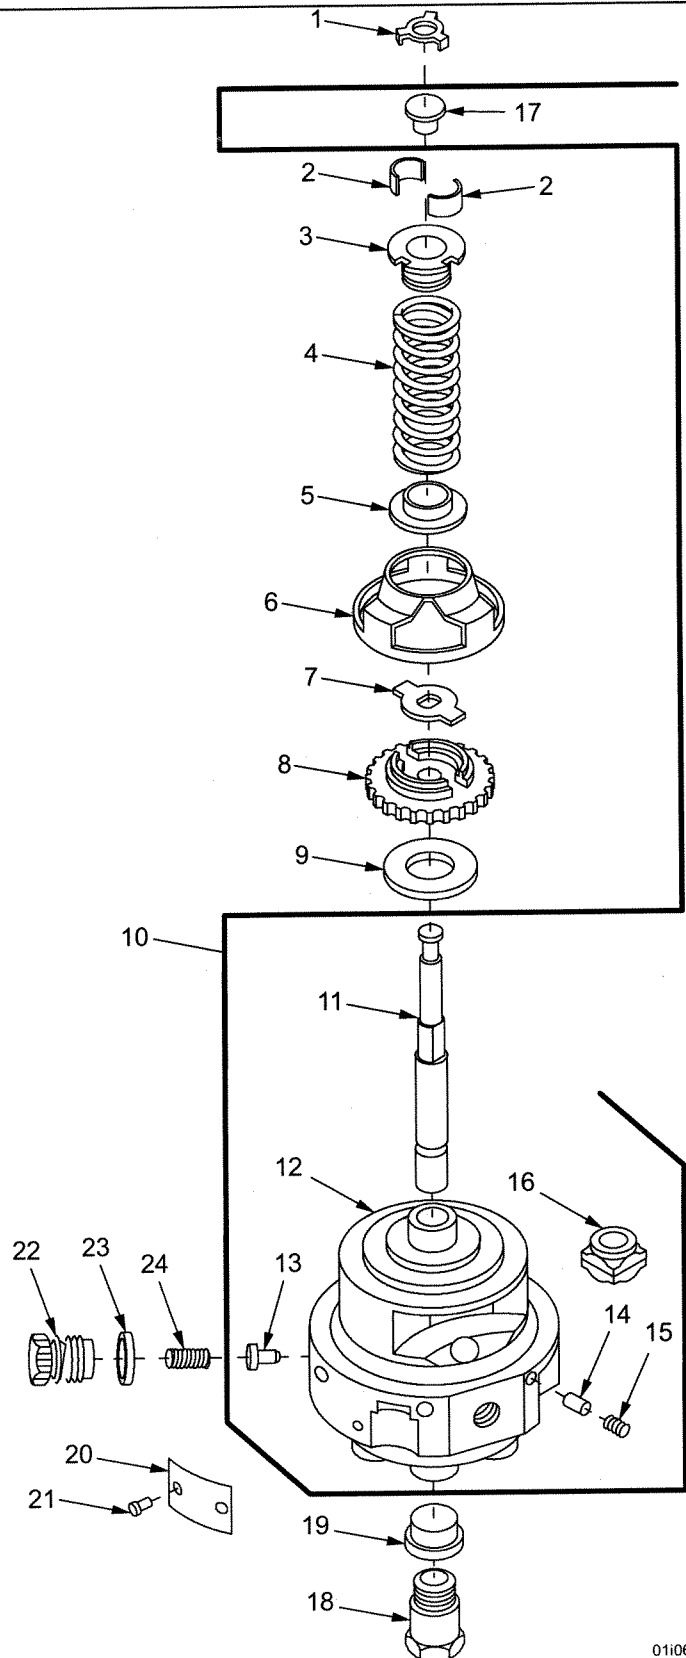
Head Assembly, Tappet Assembly, Gear Shaft Assembly, Control Unit Assembly and Associated Parts.
